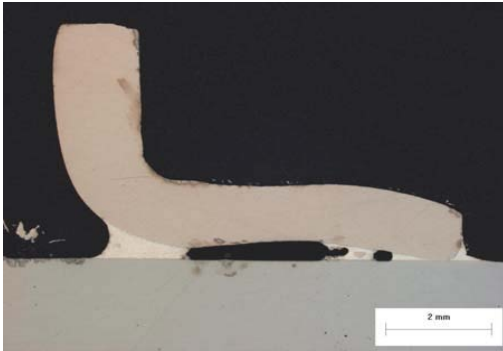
Assembly #1 Braze Joint Voids with Bowed Fin Leg
